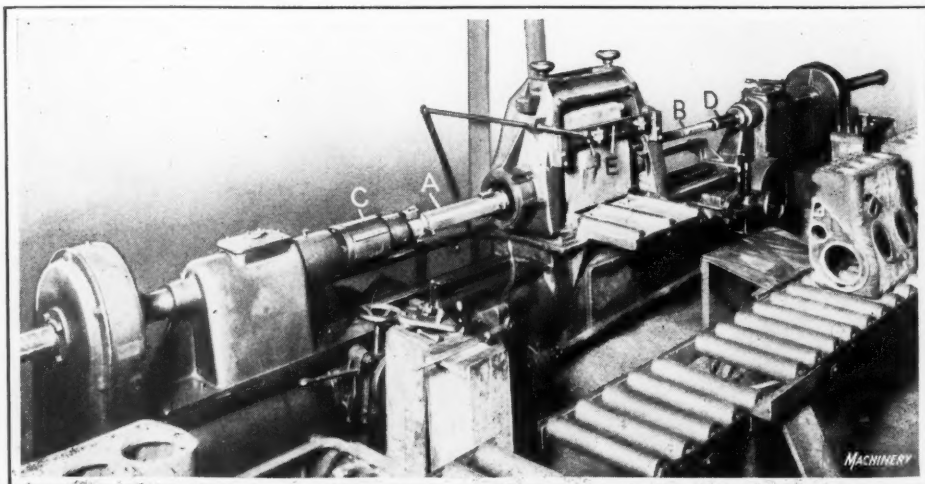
Line-reaming the Crankshaft and Camshaft Bores in the Cylinder Block
